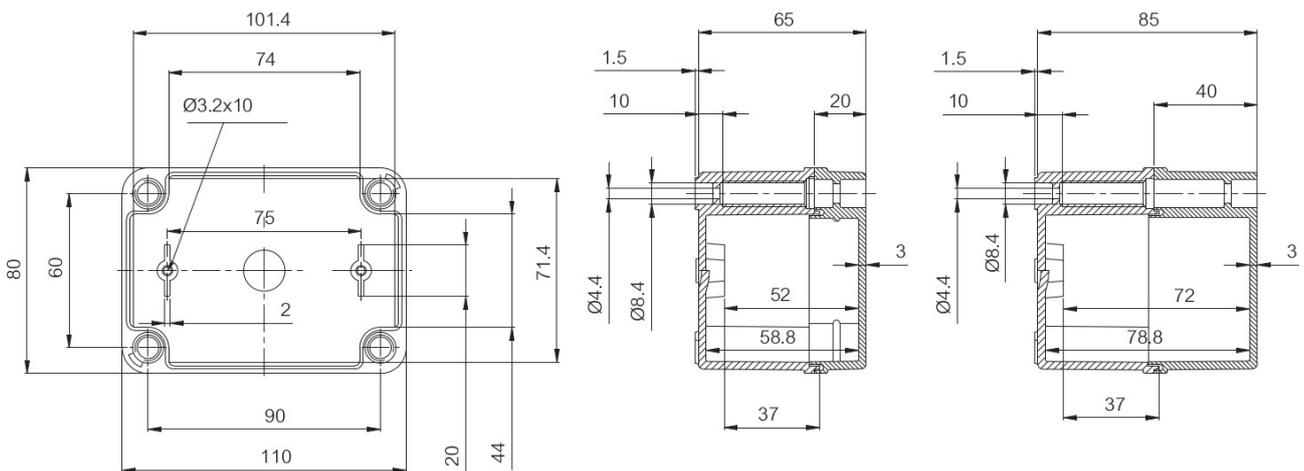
Housing dimensions. Note: Drawing not including air inlet. Dimensions in mm.
